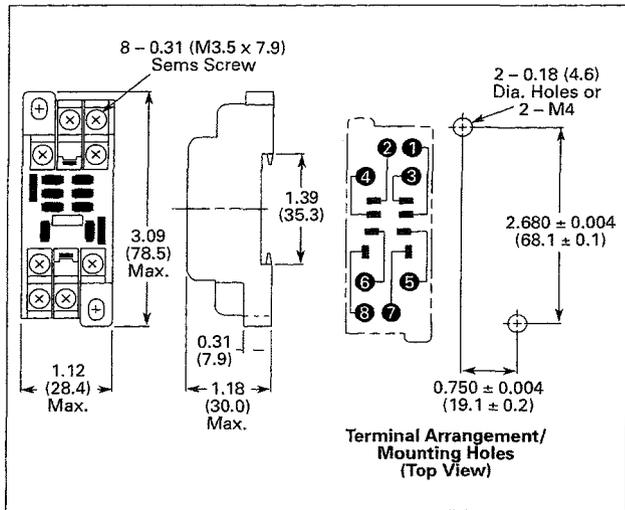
D7PA2 — Approximate Dimensions in Inches (mm)
